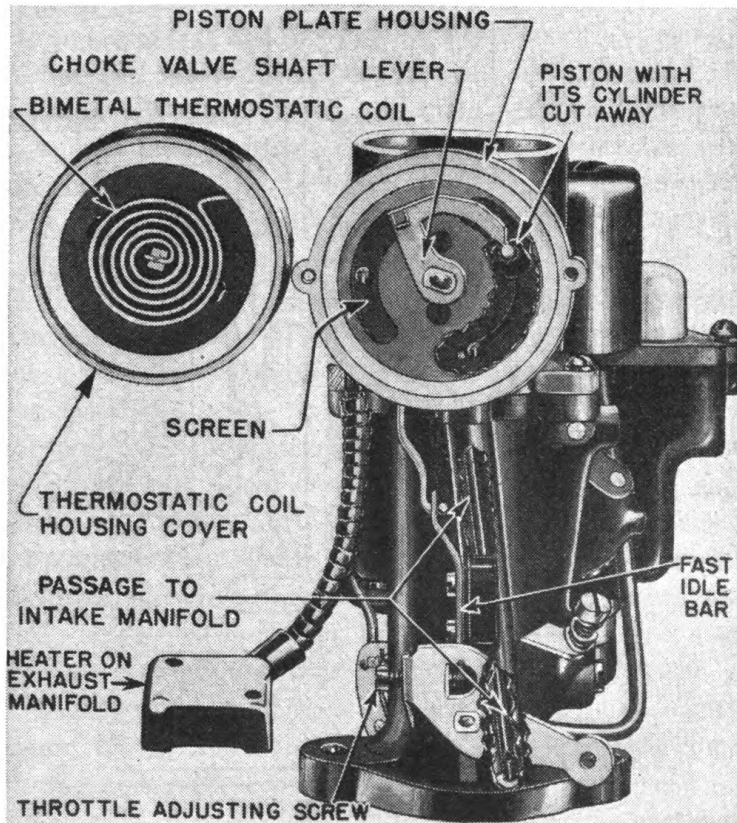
An automatic choke mechanism built into a metering rod type carburetor.
